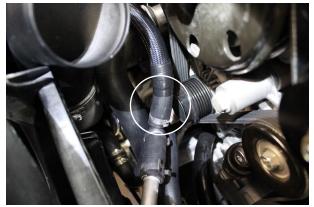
v: Install 3ft Length Of 5/8" Coolant Hose & Secure
